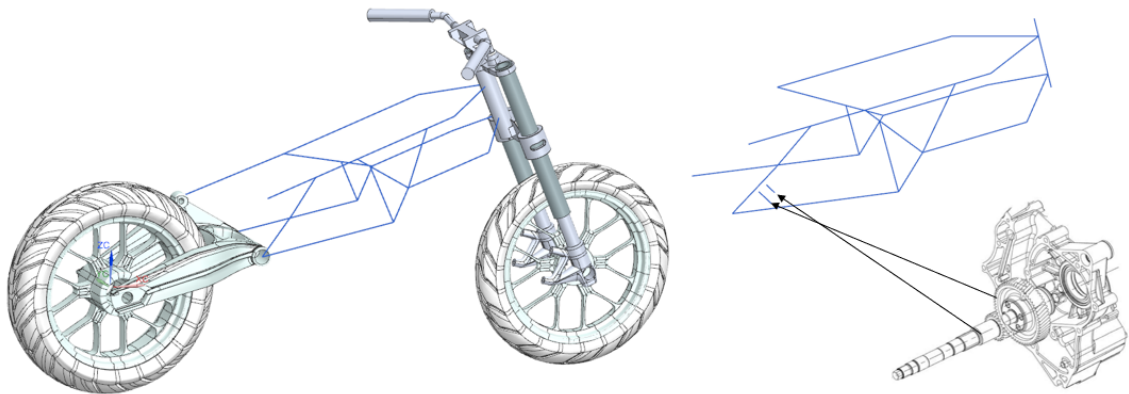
Motorcycle assembly (left) and 2 dummy shafts (right).
